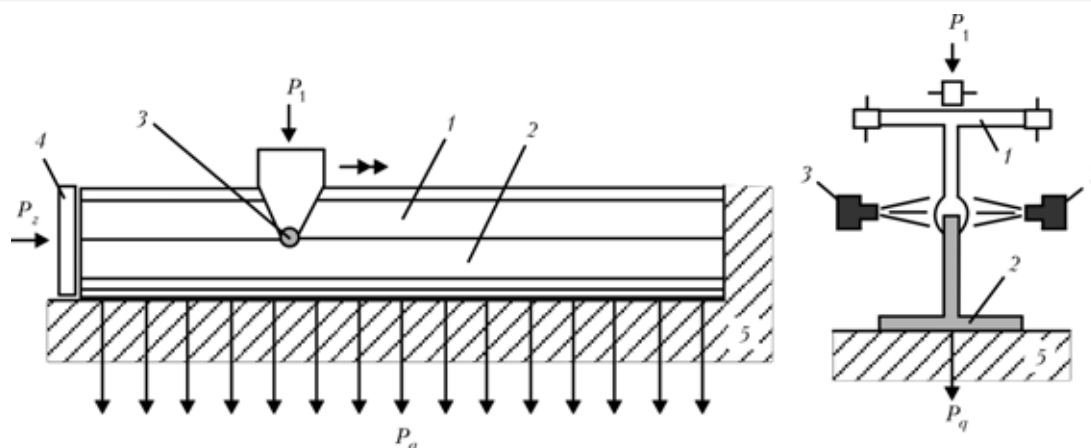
Scheme of the laser brazing-welding of titanium-aluminum joints: 1 — aluminum part; 2 — titanium part; 3 — laser welding heat source; 4 — plunger providing axis force; 5 — supporting table
